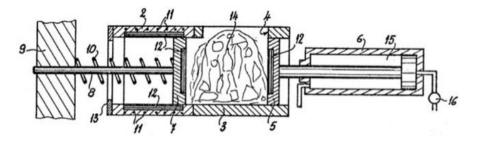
Apparatus for compacting thermoplastic sheet or film (1976, FR2294037 A1, ALDES ATEL LYONNAIS EMBOUTISSA). 2, Container; 3, Tubular chamber; 4, Opening (load and discharge); 5, Piston; 6, Hydraulic jack; 7, Piston; 8, Guide system/rod; 9, Fixed support; 10, Helical spring; 11, Heating plugs; 12, Circuit for the circulation coolant; 13, Stopper; 14, Plastic materials; 15, Chamber of 6; and 16, Pressure regulator.
